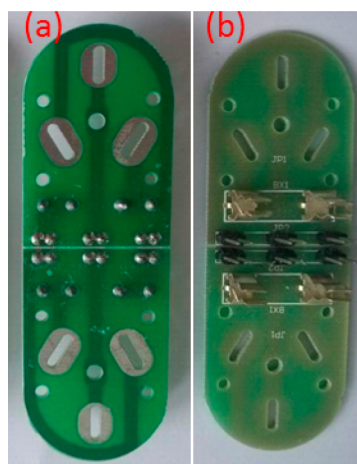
Examined PCB samples: (a) front side and (b) back side.
